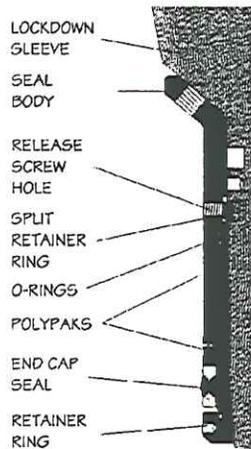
detail of a metal-to-metal type Seal Assembly
